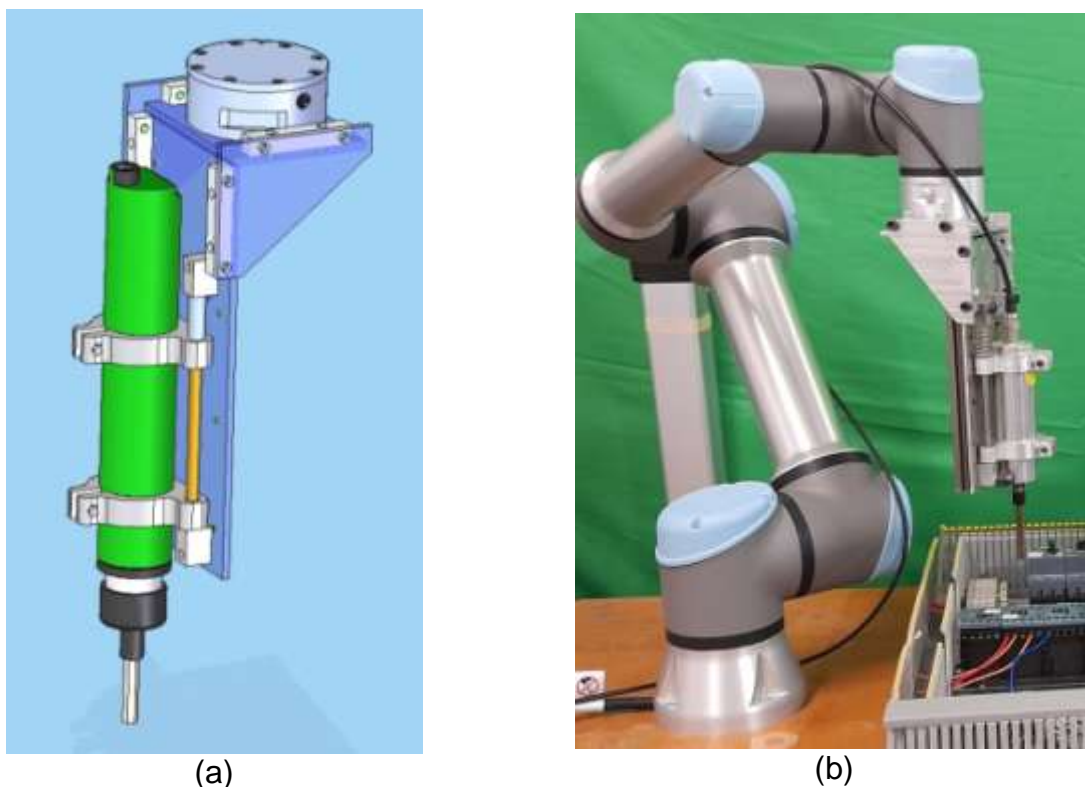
CAD model of the screwdriver with robot support (a), picture of the tool mounted on the robot (b).
